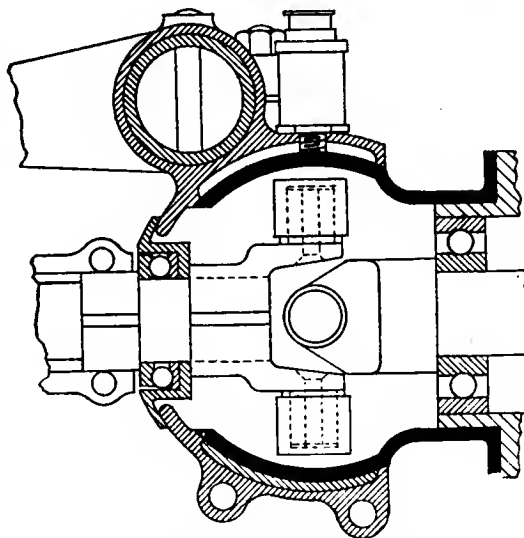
A typical ball joint inclosure at the front end of a torque tube
